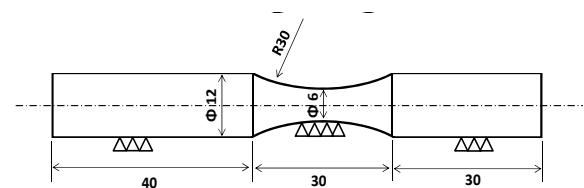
Geometry of hourglass-shaped test specimen (unit: mm).
